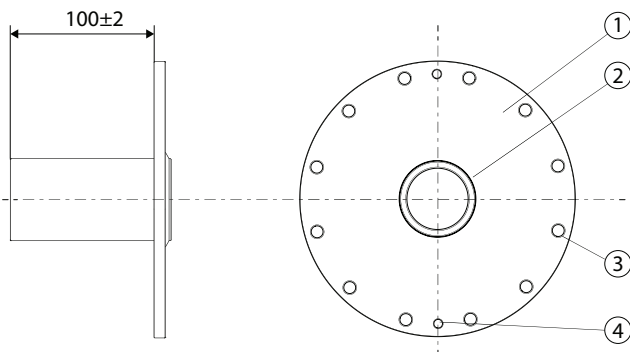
$\phi 180$ flange covers with 2" sleeve
